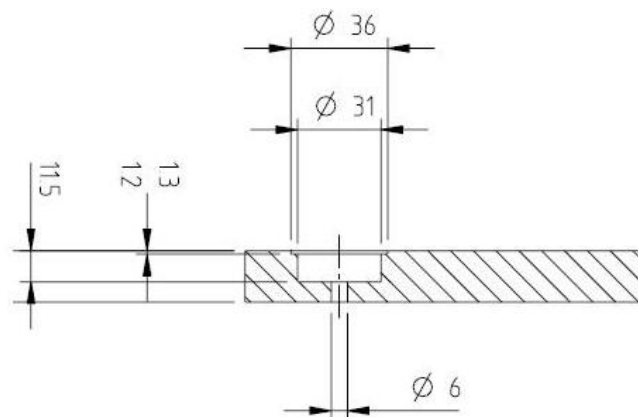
Profile of the copper disc mounting and air gap configuration on the instrumentation boards (dimensions in mm)
